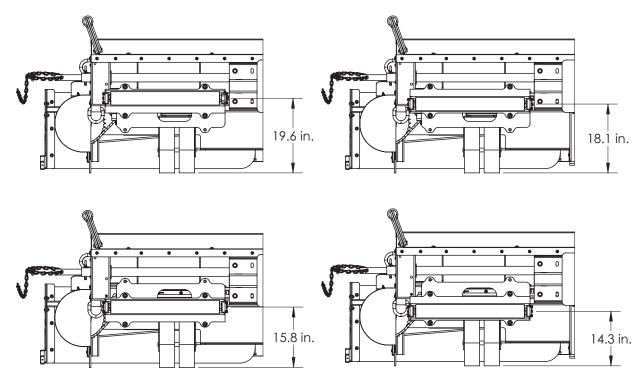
Adjustable-height push roller has (4) possible heights, depending on orientation of push roller plate and mounting holes used. All dimensions approximate, from the ground to the center of the push roller.
